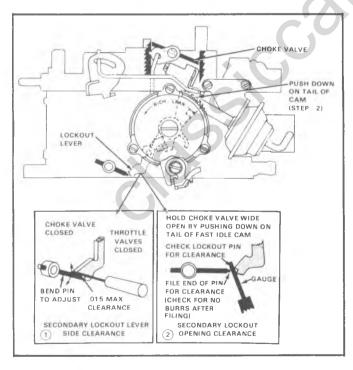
Secondary Throttle Valve Lock-Out Adjustment
